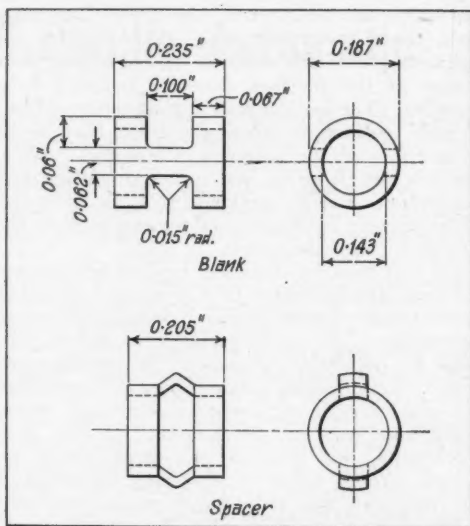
Details of one of five sizes of spacers employed on the feed roll shafts of typewriters made by Underwood Business Machines, Ltd. It is produced by milling and compressing operations on a single-spindle automatic
